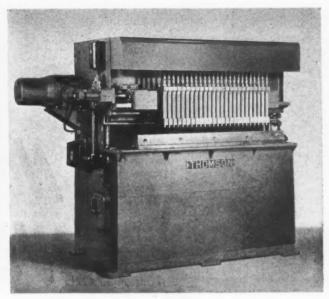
Thomson "Ultra Speed" Spot-welder
